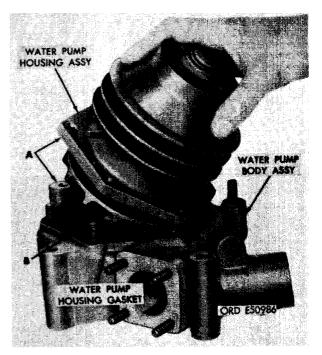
REMOVING WATER PUMP HOUSING FROM WATER PUMP BODY ASSEMBLY.
